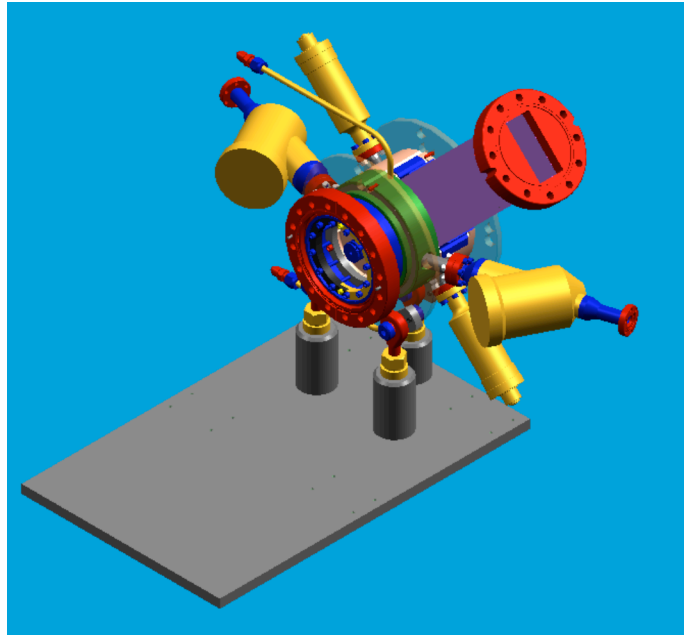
Three-dimensional rendered drawing (rear view) of ORION version of the 1.6 cell RF photocathode gun and related vacuum and waveguide components and ports. All access flanges removed for viewing purposes. (courtesy D. Palmer, SLAC ARDB)
